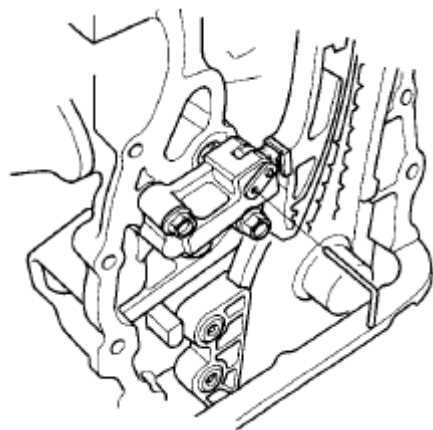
Identifying Auto-Tensioner And Lock Pin
